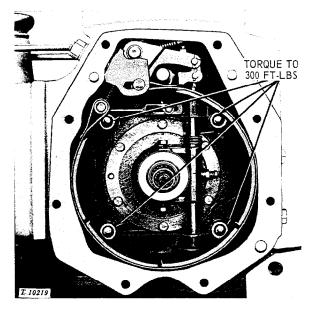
Torquing Steering Clutch Hex. Nuts
